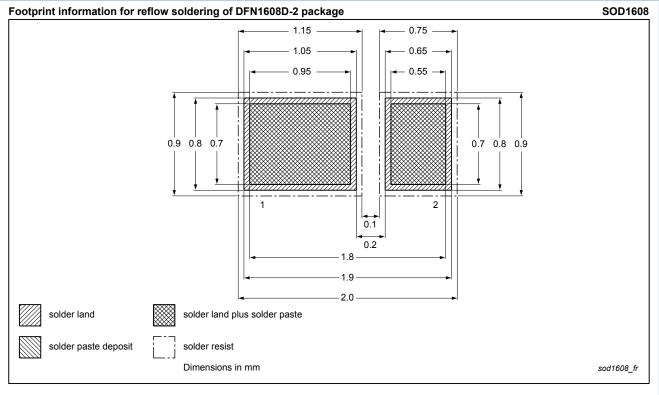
Reflow soldering footprint for DFN1608D-2 (SOD1608)
